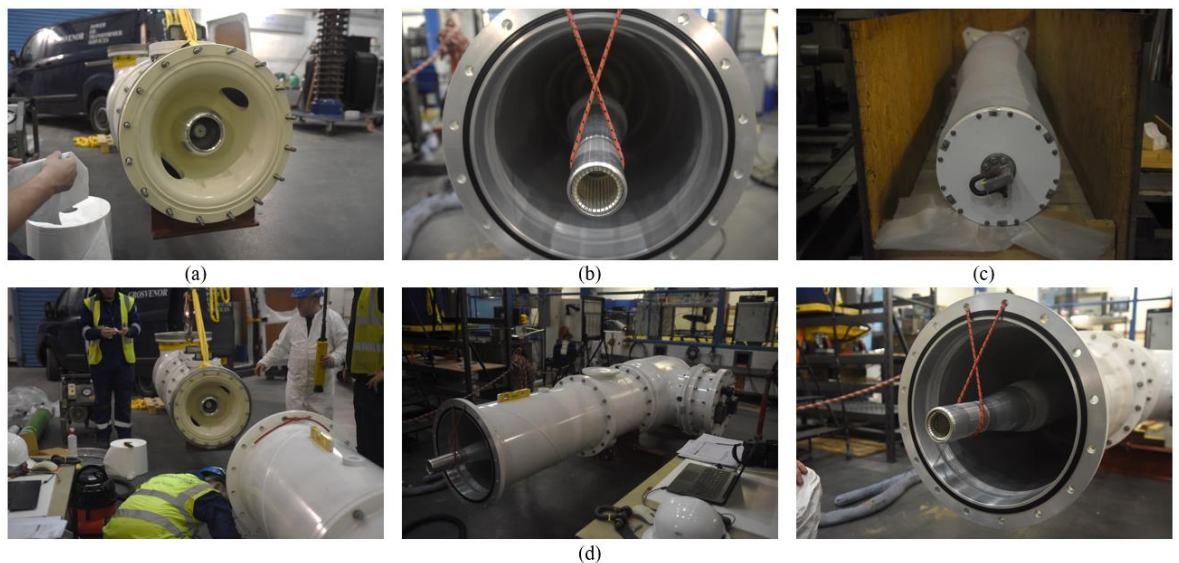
GIB demonstrator setup (a) insulating spacer (b) straight conductor section (c) HV bushing and (d) demonstrator assembly process.
